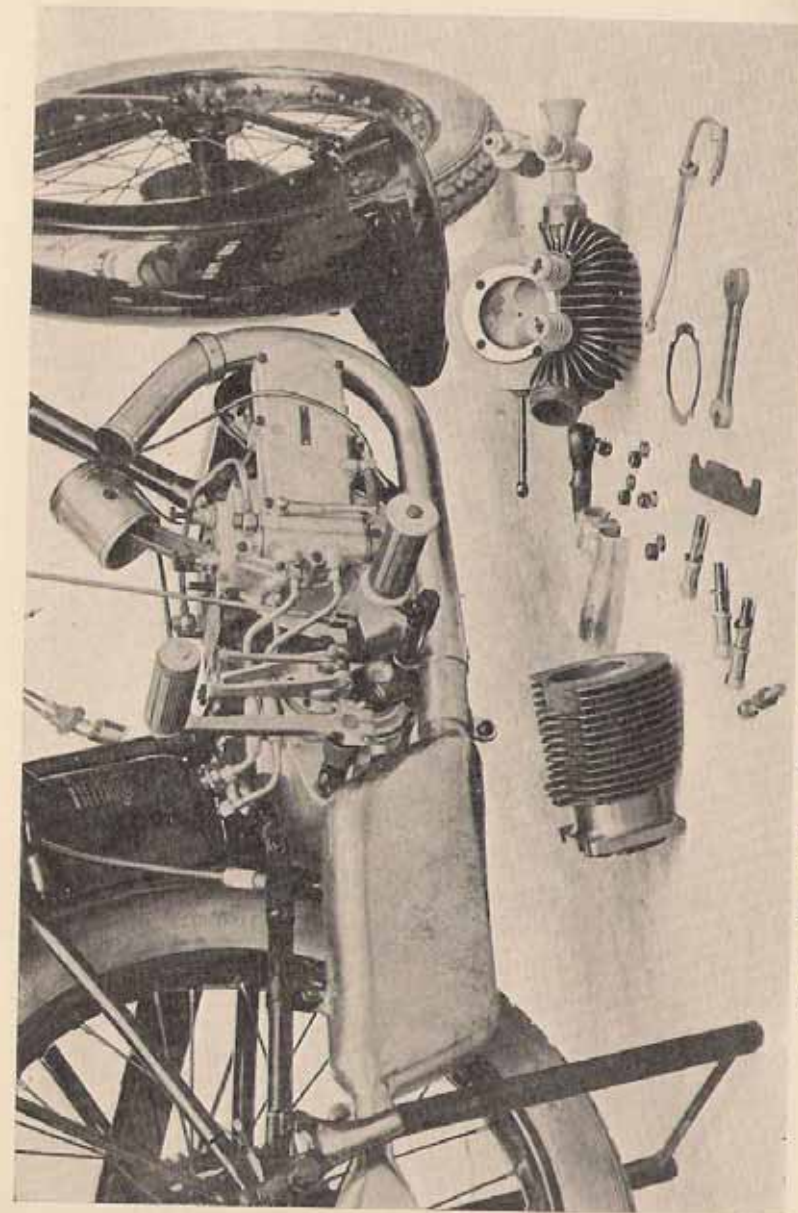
THE 3-49 H.P. SIDE VALVE ENGINE STRIPPED FOR DECARBONIZATION
